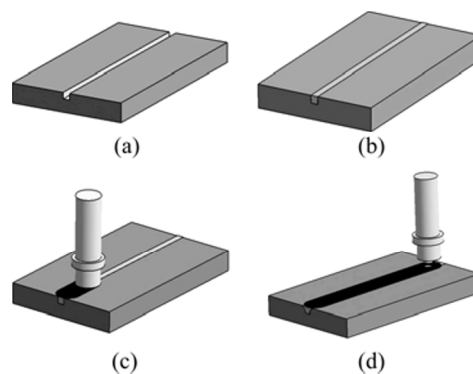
FSP procedure to fabricate surface composite: (a) Cutting groove; (b) Compacting groove with ceramic particles; (c) Processing using pinless tool; (d) Processing using tool with pin
